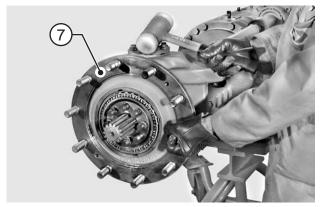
Partially extract the wheel hub (7) by using a plastic hammer.
